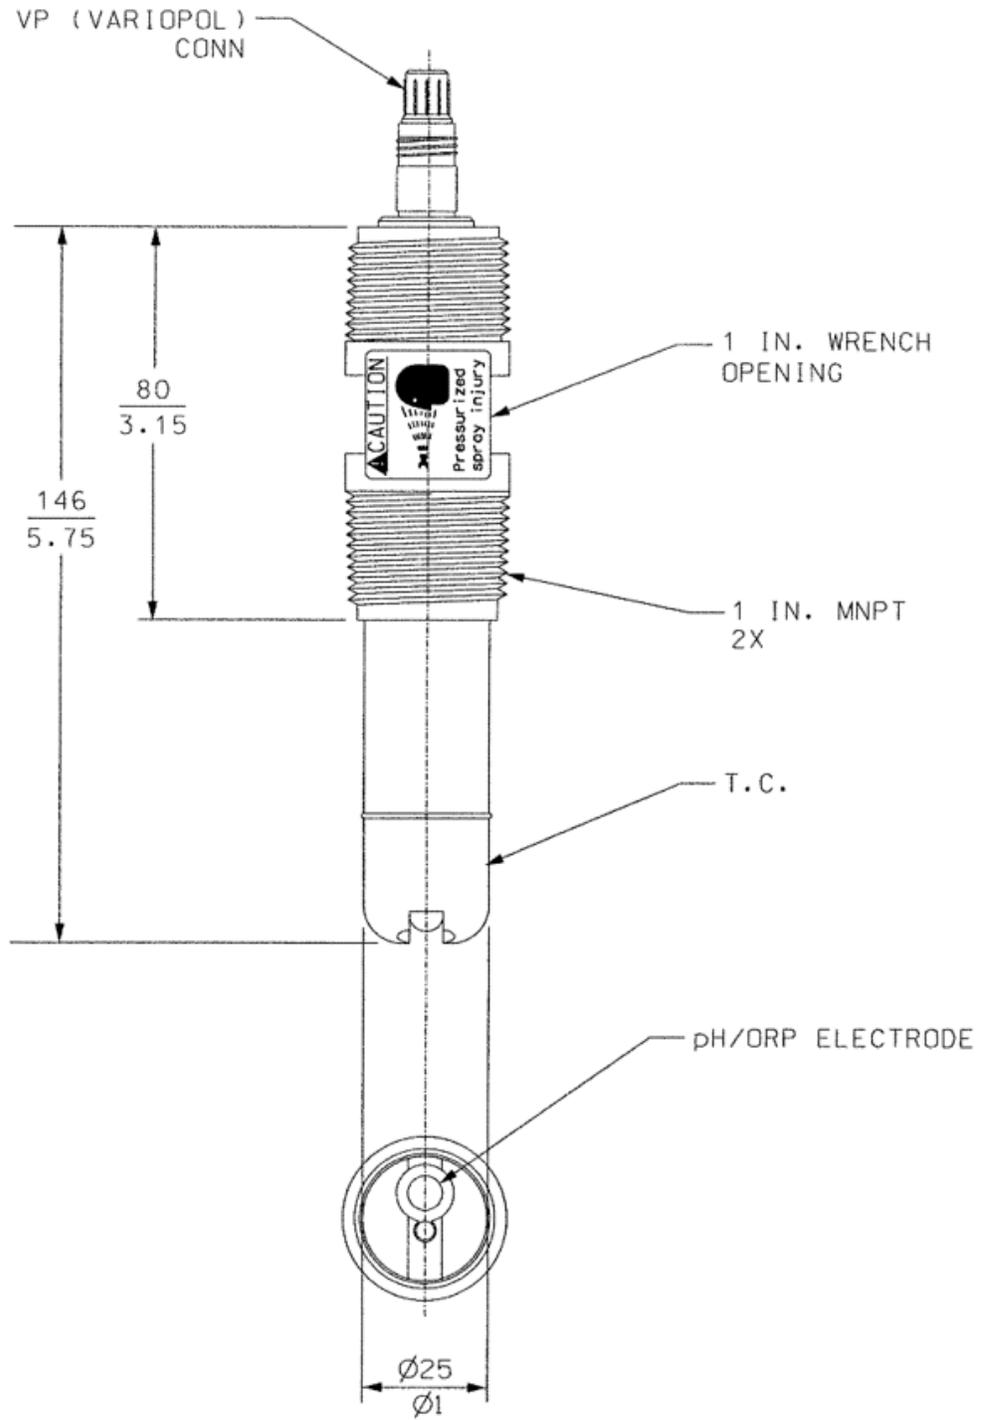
Rosemount 389VP Sensor dimensional drawing
